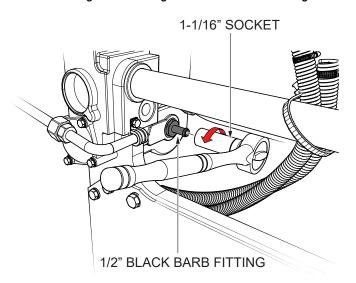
1/2" Black Barb Fitting Removal Engine Block Side
